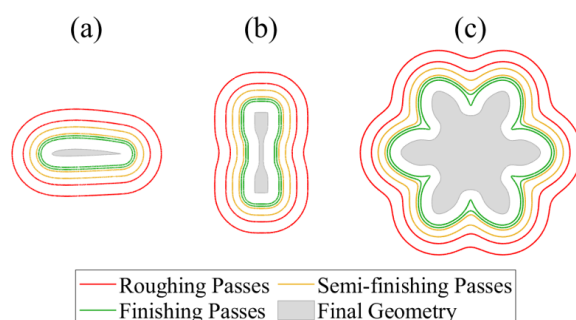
The part geometries and the cutting passes used in the experimental case studies for the machining of (a) an airfoil shape, (b) a tensile test specimen, and (c) a spur gear.
